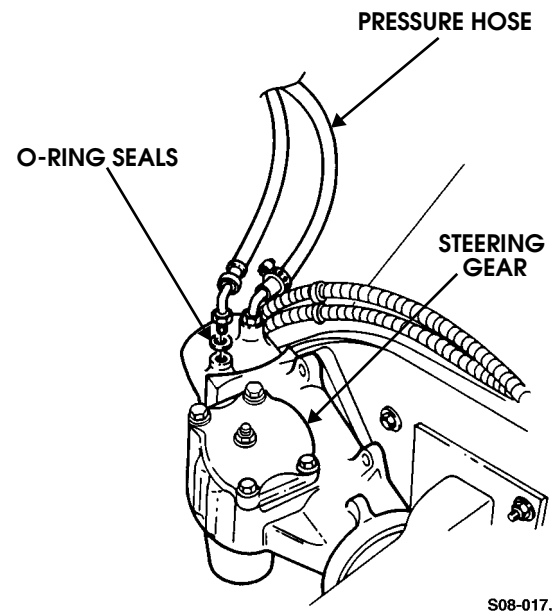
Power Steering Hose Replacement at Steering Gear
